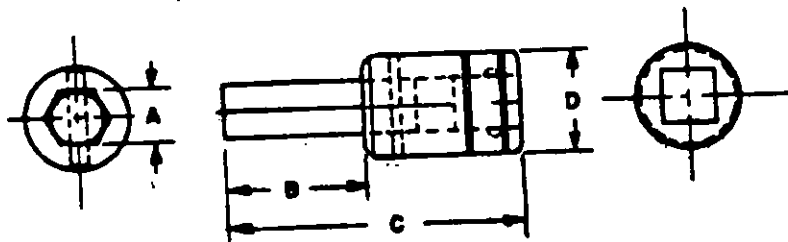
Type IV, class 3, style B attachment, socket wrench, internal (socket head set and cap screws), long bit point.
